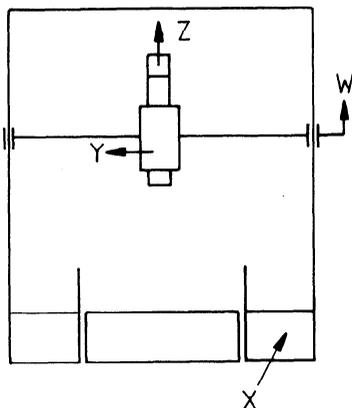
Type 1: Machine with one milling head on a movable cross-rail
